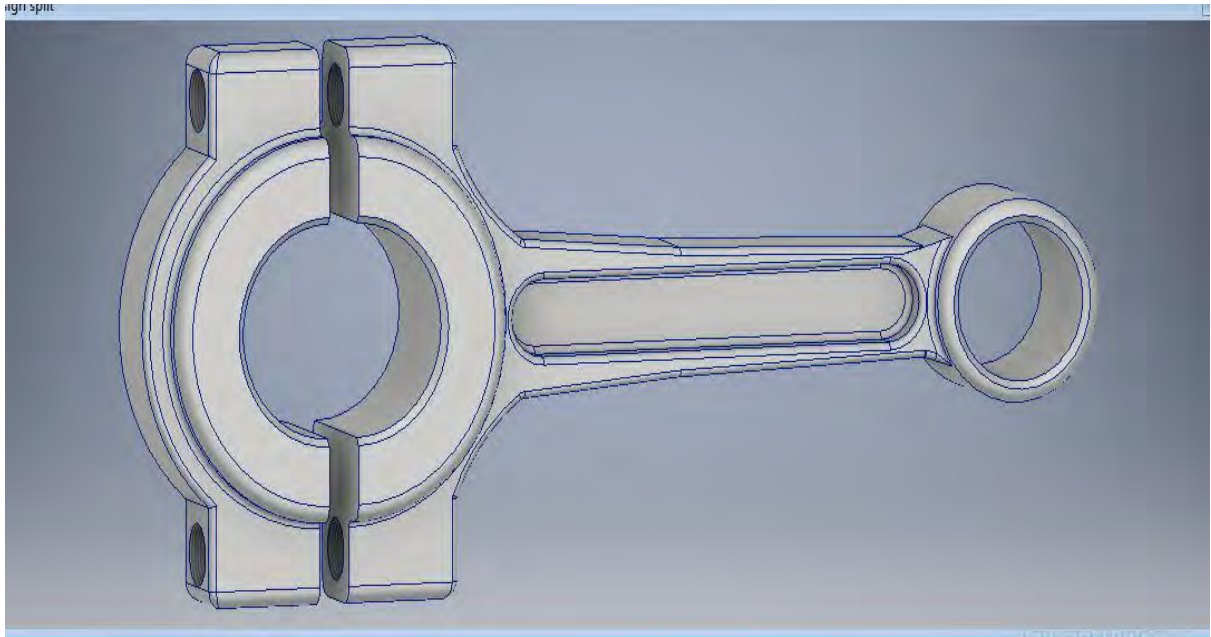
The Connecting Rod with the Big End Cap Splitted from the Bottom
